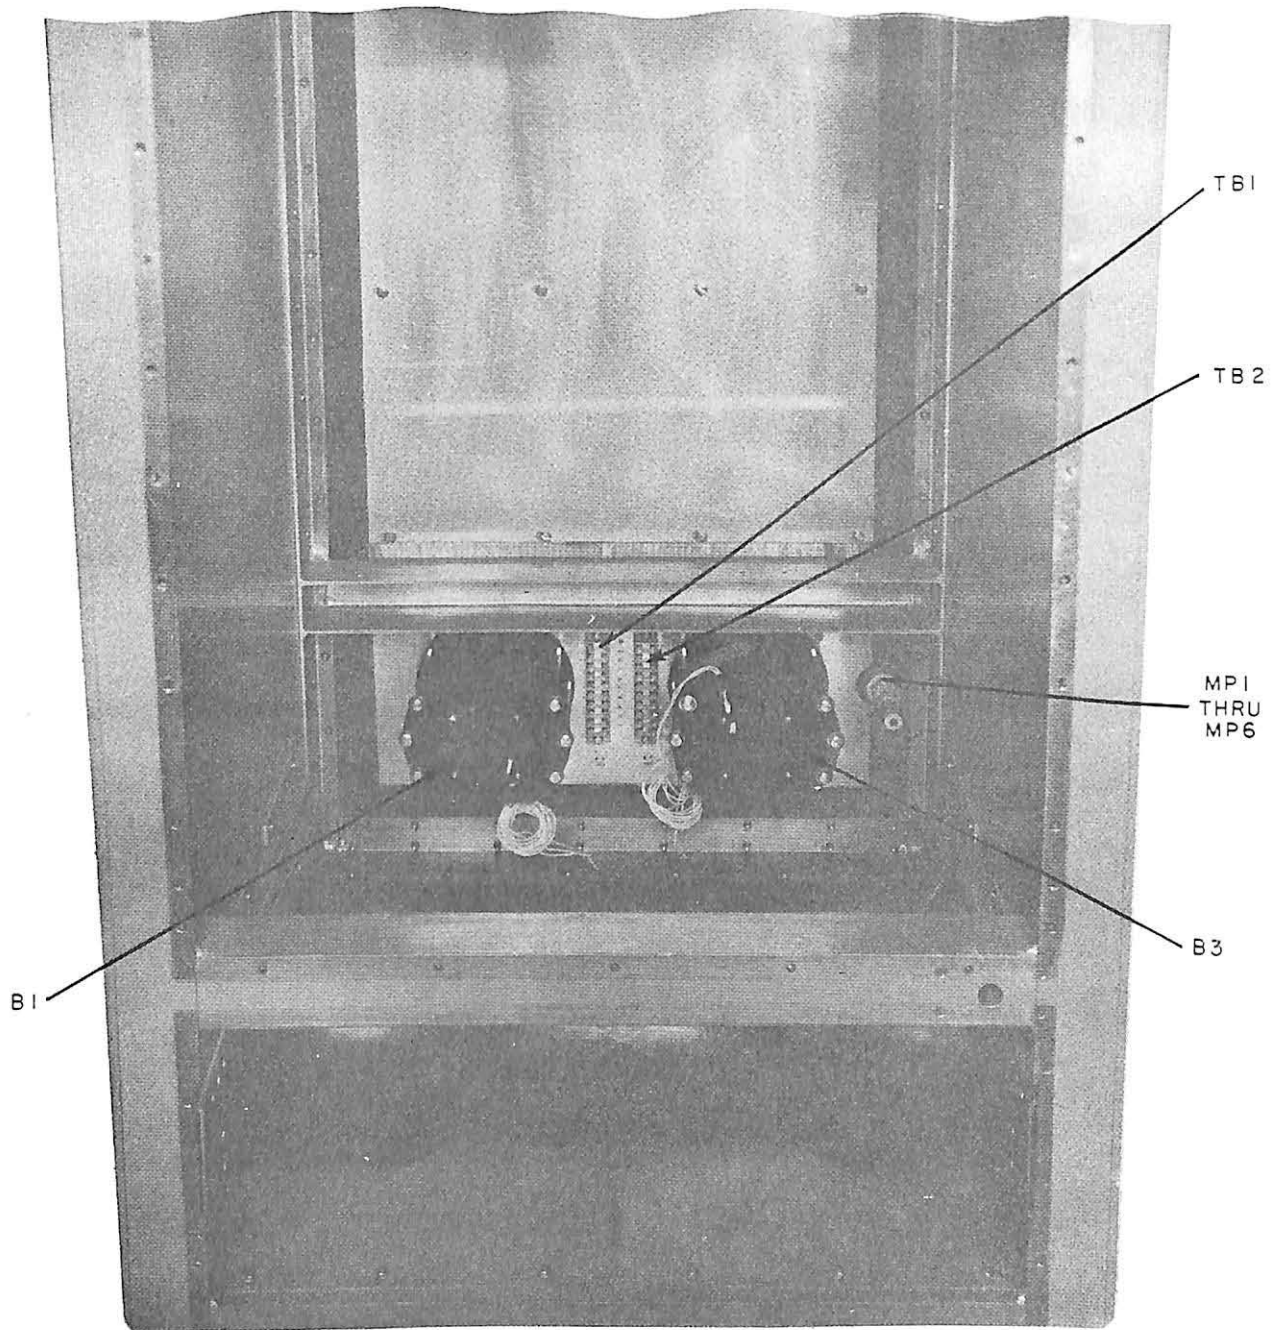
Tape Transport Cabinet, Partially Assembled View of Lower Half, Water Cooled
